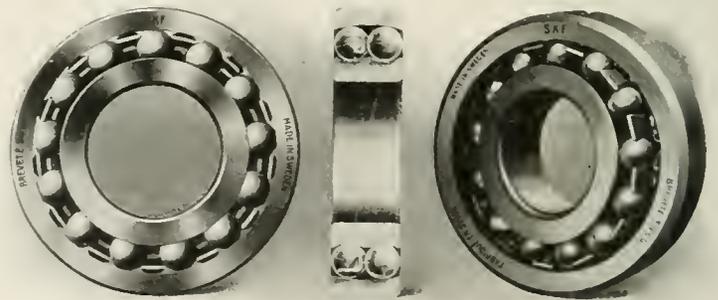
An SKF Ball Bearing Shown in Normal Sectional and Deflected Positions
